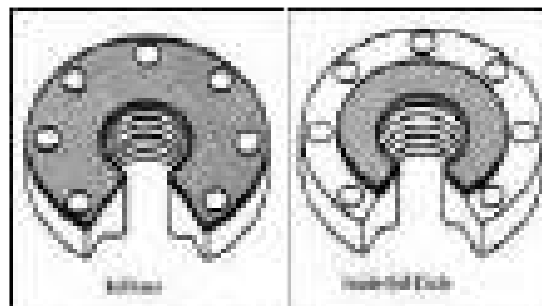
Full Face & Inside Bolt Circle Images
